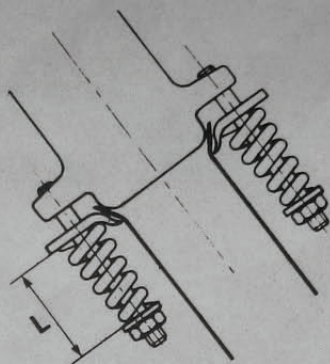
Exhaust front pipe flange tension spring dimension (Sec 19)
